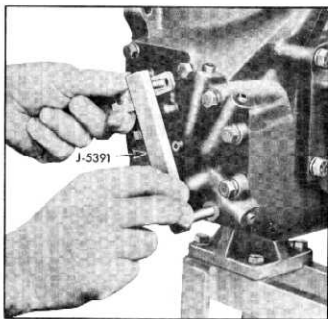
Use of Outer Throttle Valve Lever Gauge
